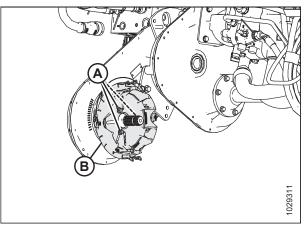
Completion Gearbox Chain Tensioner Cover
